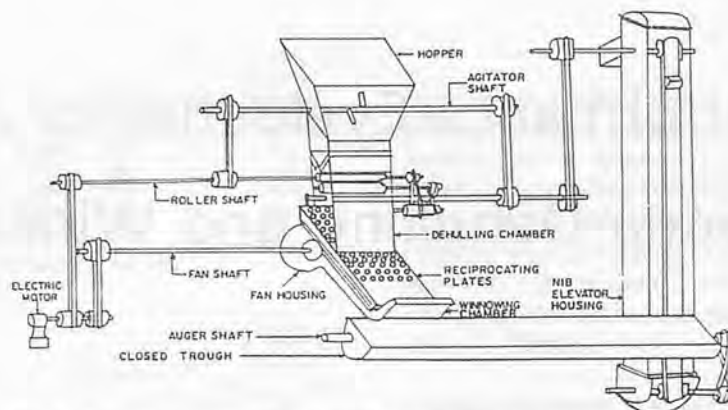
Schematic diagram of the cocoa dehulling and winnowing machine.
